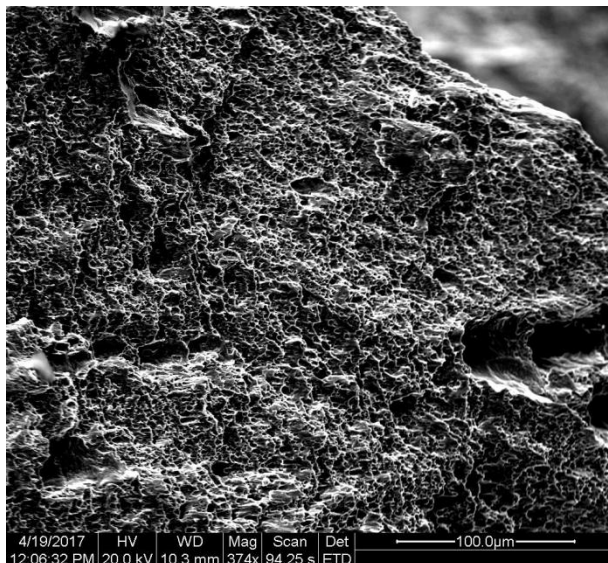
Fracture surface of the horizontally-built nominal sample at low magnification.
